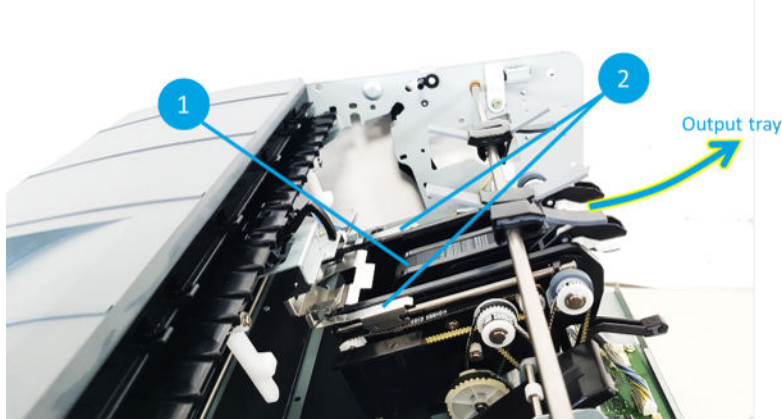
Inner finisher system - ejector unit detail view (2/3)
